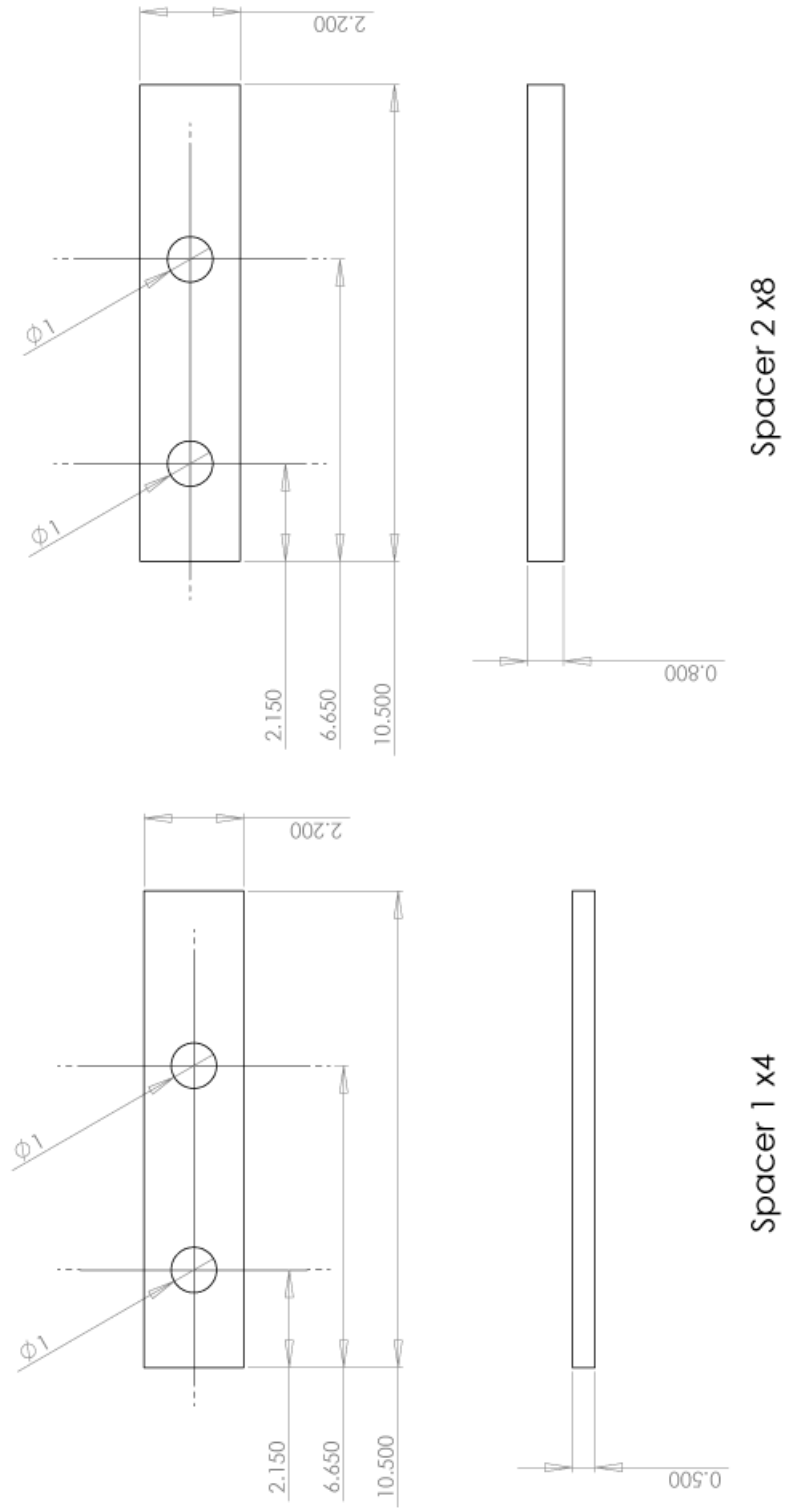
A SolidWorks drawing of the spacers that separate the electrodes.
